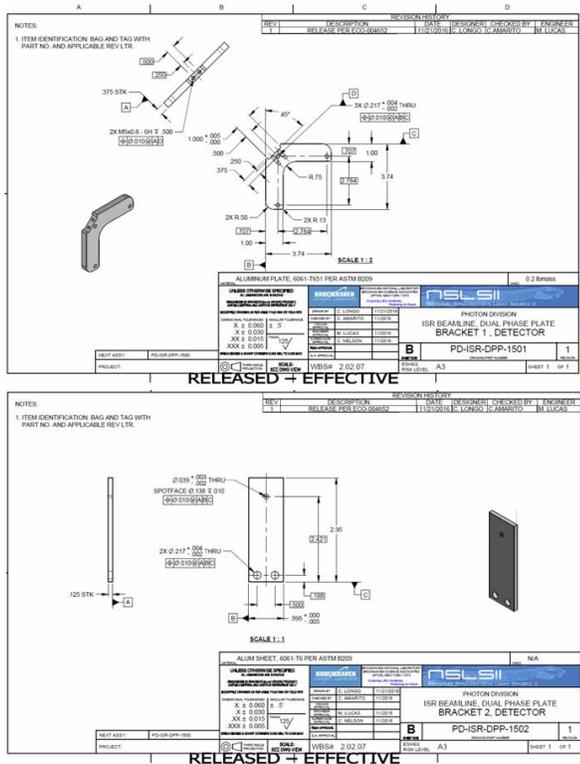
ISR: Drawings of the alignment tool mount components for the Dual Phase Plate Assembly.
